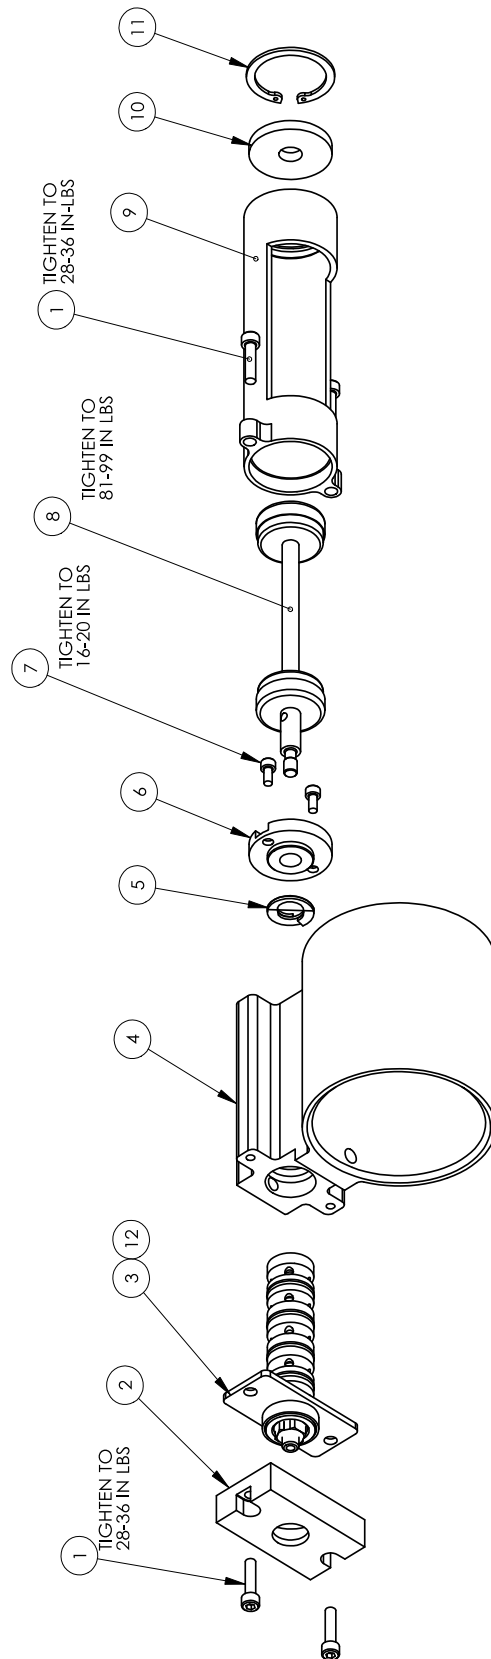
Shifter assembly/High-output Double-Acting pump
